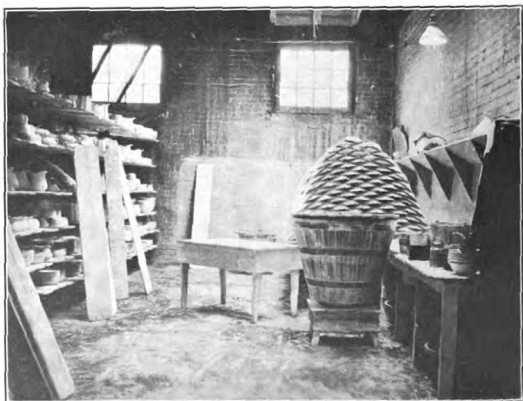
DIPPING ROOM. DIRTY WARE BOARDS, GLAZE ON FLOOR, AND DIRTY WALLS. NOTE LUNCH BASKETS ON WORK BENCH AND WRAPS HANGING ON WALLS.
